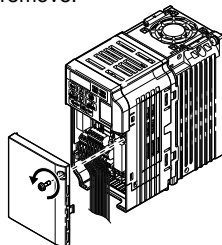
Remove the Front Cover on an IP20/Open-Chassis Drive
